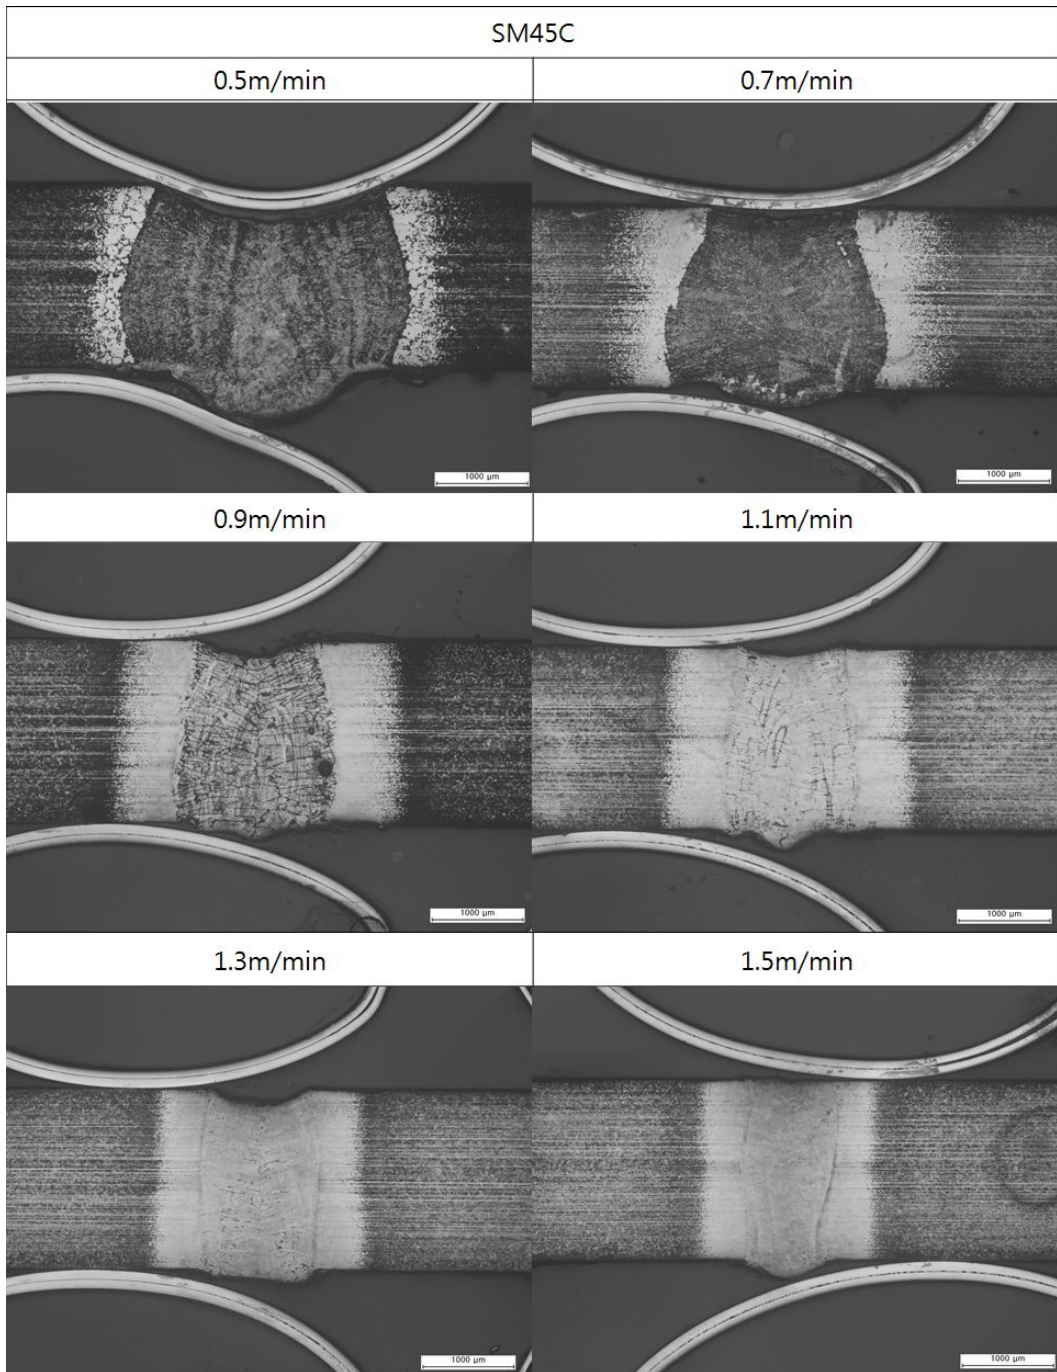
Welding cross-sectional area to variation of welding process parameters
